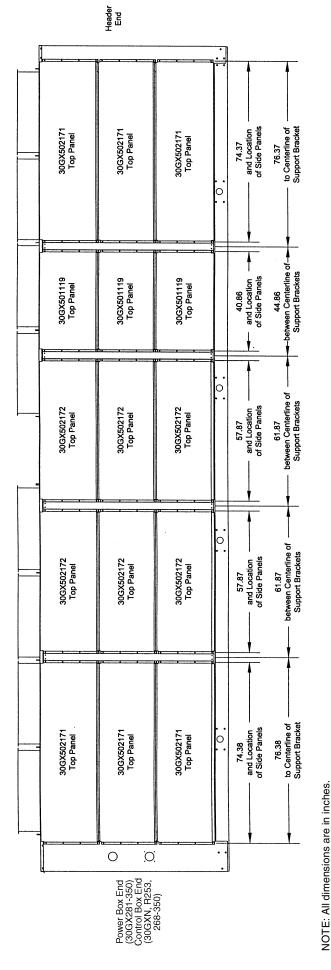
K — Unit Assembly, 30GX281-350 Cooler Side Only, 30GXN,R253, 268-350 Both Sides
